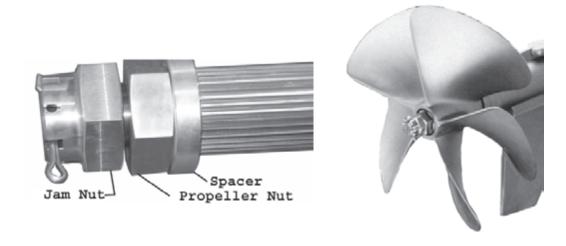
Propeller Retaining Parts (left), and Propeller Installed (right)
